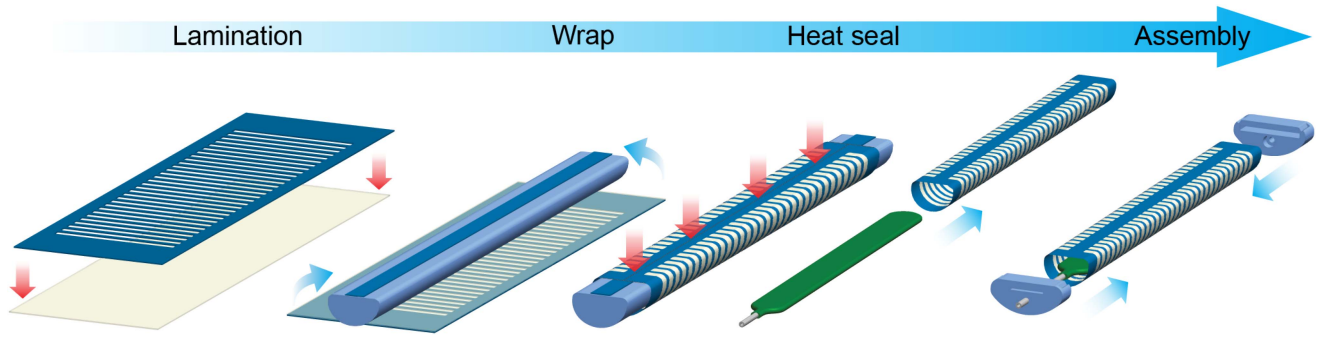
Manufacturing process for fabricating fabric-shelled actuators.
